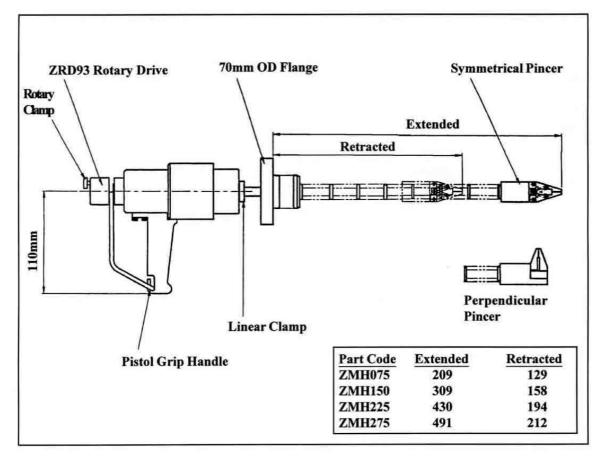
The Mechanical Hand with details of extended and retracted dimensions
